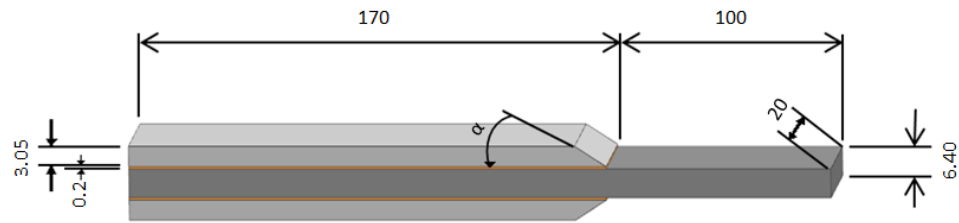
Specimen type and dimensions used in taper angle experiment; dimensions in mm [47]
